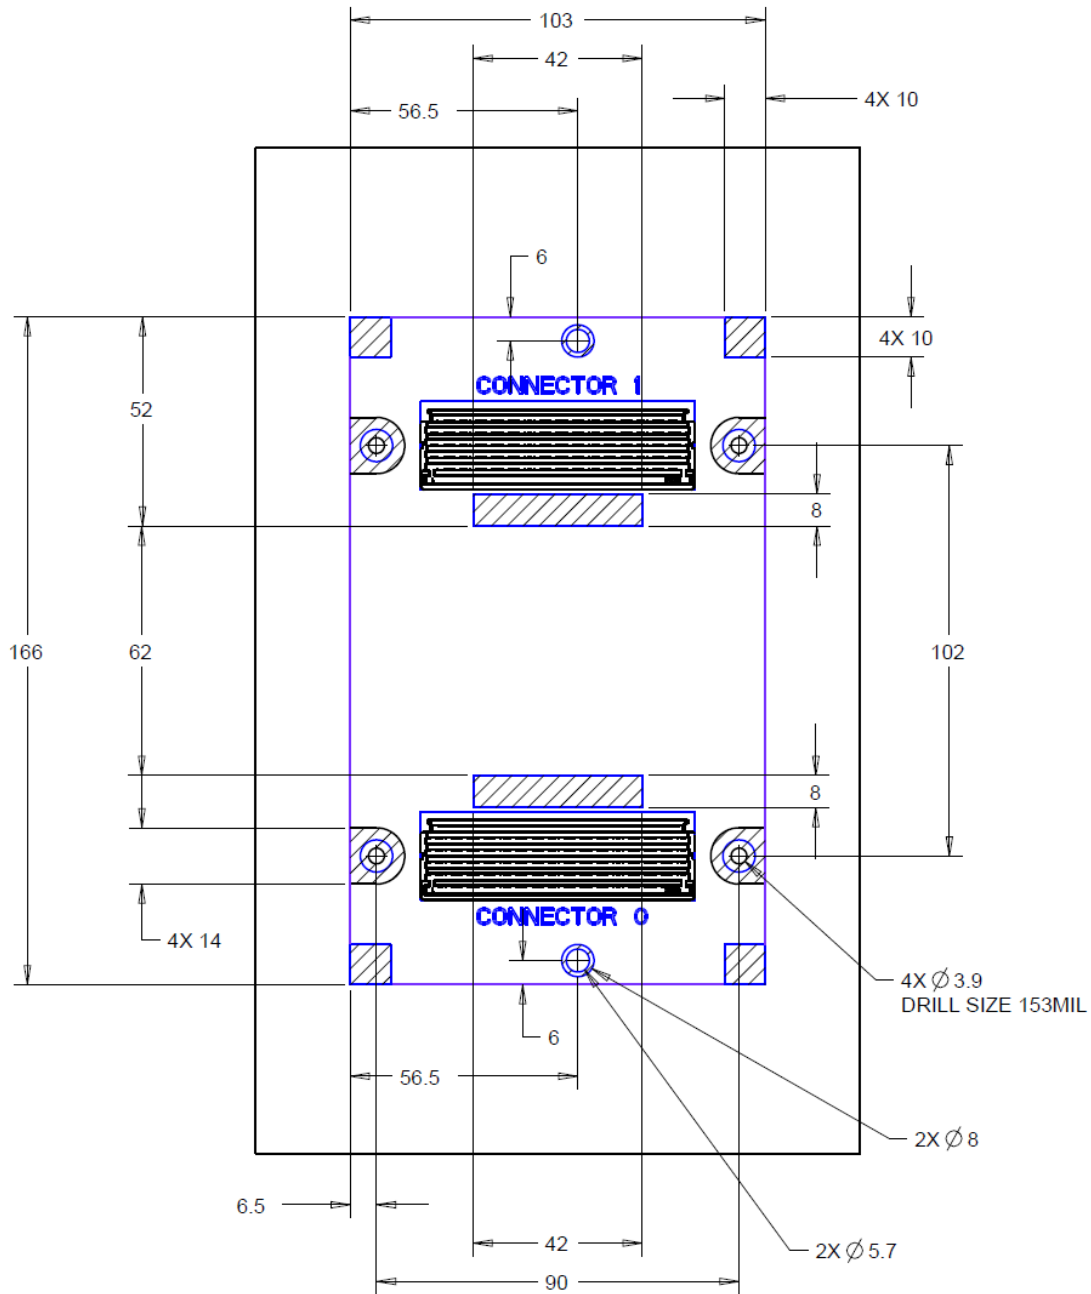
Baseboard KOZ and Grounding Pad Dimensions
